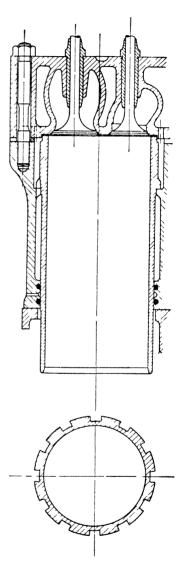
Wet liner with abutment just below cylinder-head bolt bosses
